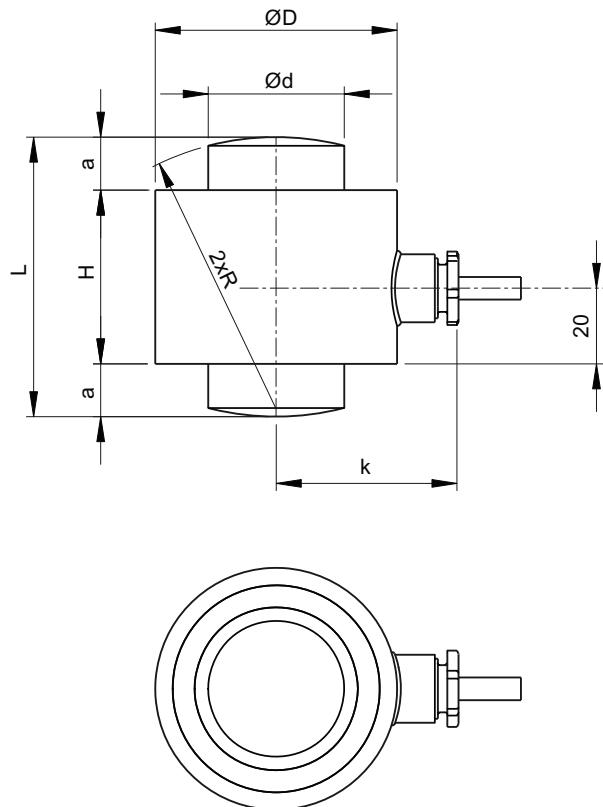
Dimension drawing for SIWAREX WL270 K-S CA
